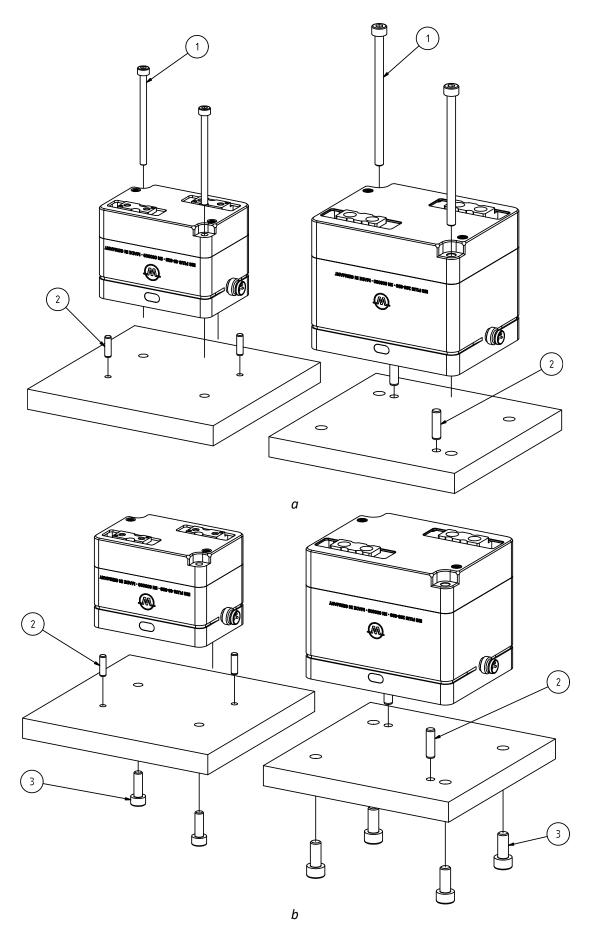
Mounting methods for the gripping module from above (a) and from below (b)
